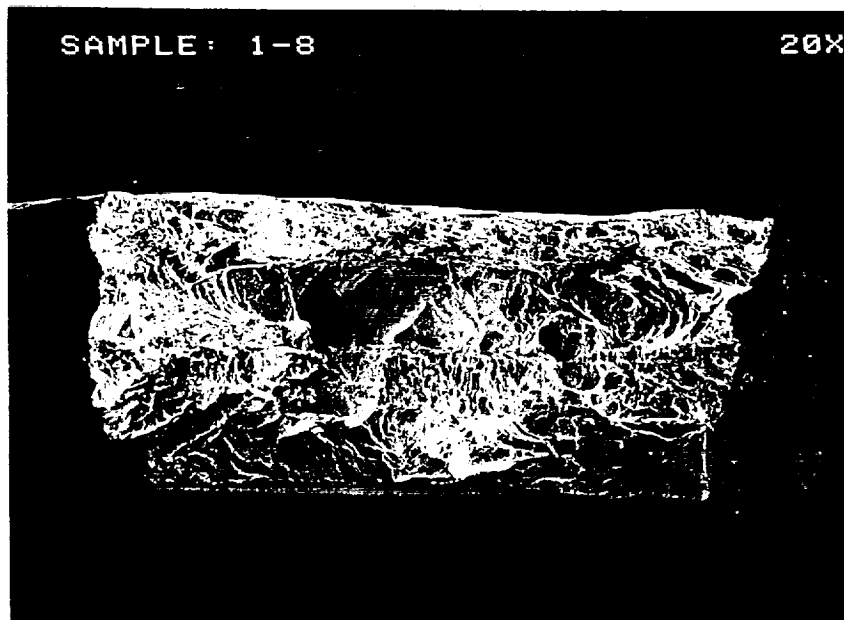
SEM view of fracture in tensile specimen 1-8, 1500F, annealed. 20X.
